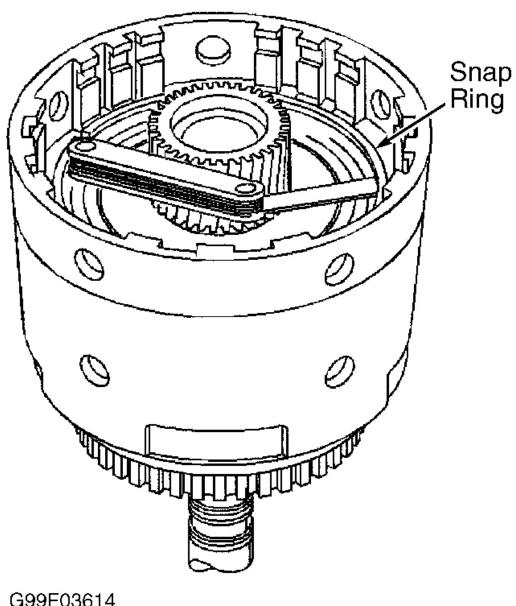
Installing Forward Clutch Assembly Components Courtesy of GENERAL MOTORS CORP.
